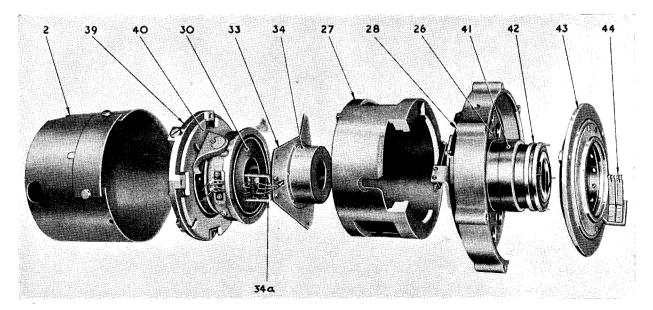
Focus, centring, and deflection coil assemblies exploded view
